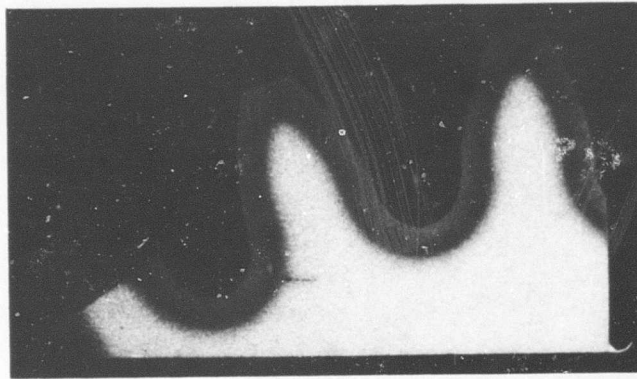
Photograph of Section Through Test Gear Showing Case Depth Around Root Fillet Contour.
